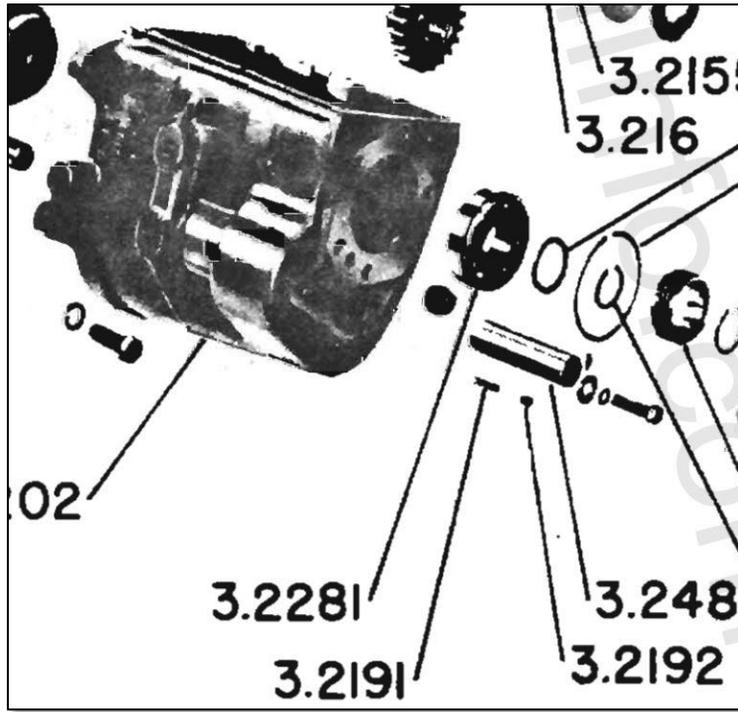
Exploded view of transmission showing Spring 3.2191 (pn 330087) and Plug 3.2192 (pn 367794)
